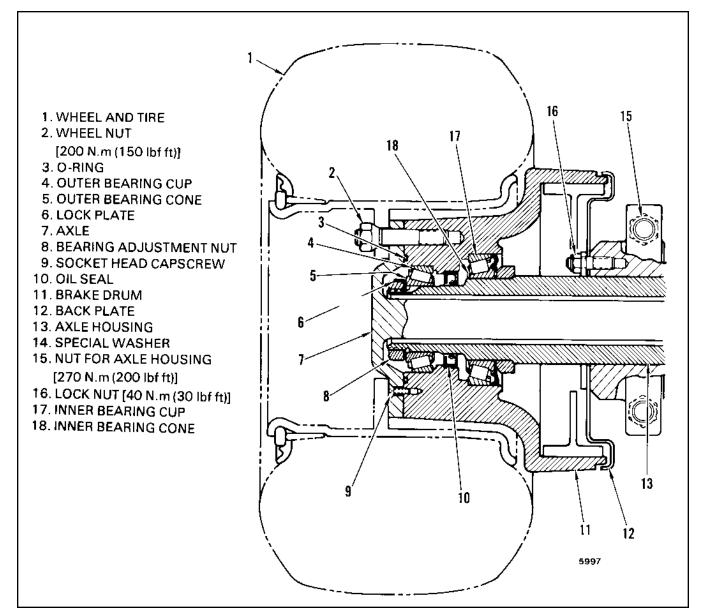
E20-30BH DRIVE WHEEL AND AXLE ARRANGEMENT
